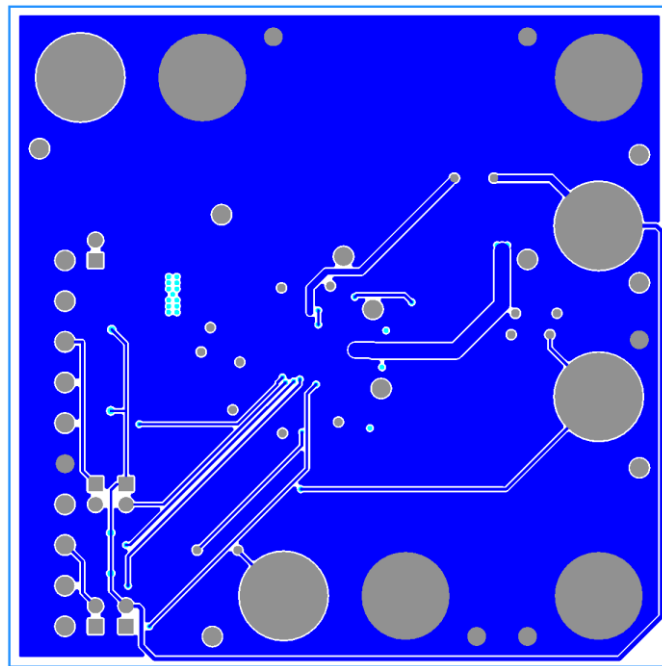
NCV97400GEVB PCB Layout – INNER ROUTING Layer
